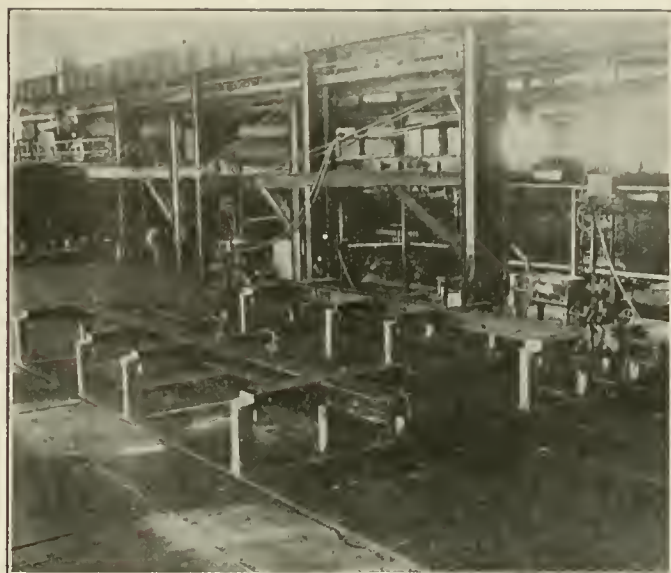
JIGS USED IN ASSEMBLING UNDERFRAMES
